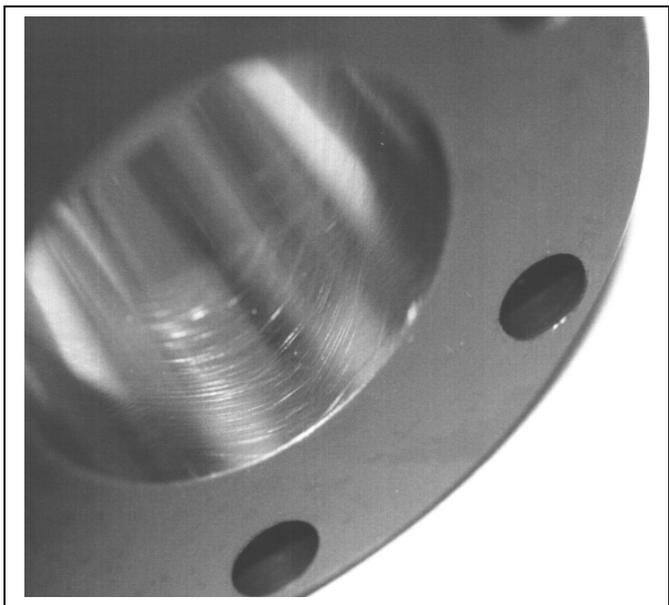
M2 tool steel sleeve bore after lubricated test with silicon nitride ball. Original hone marks are still visible, and no wear is observed.
